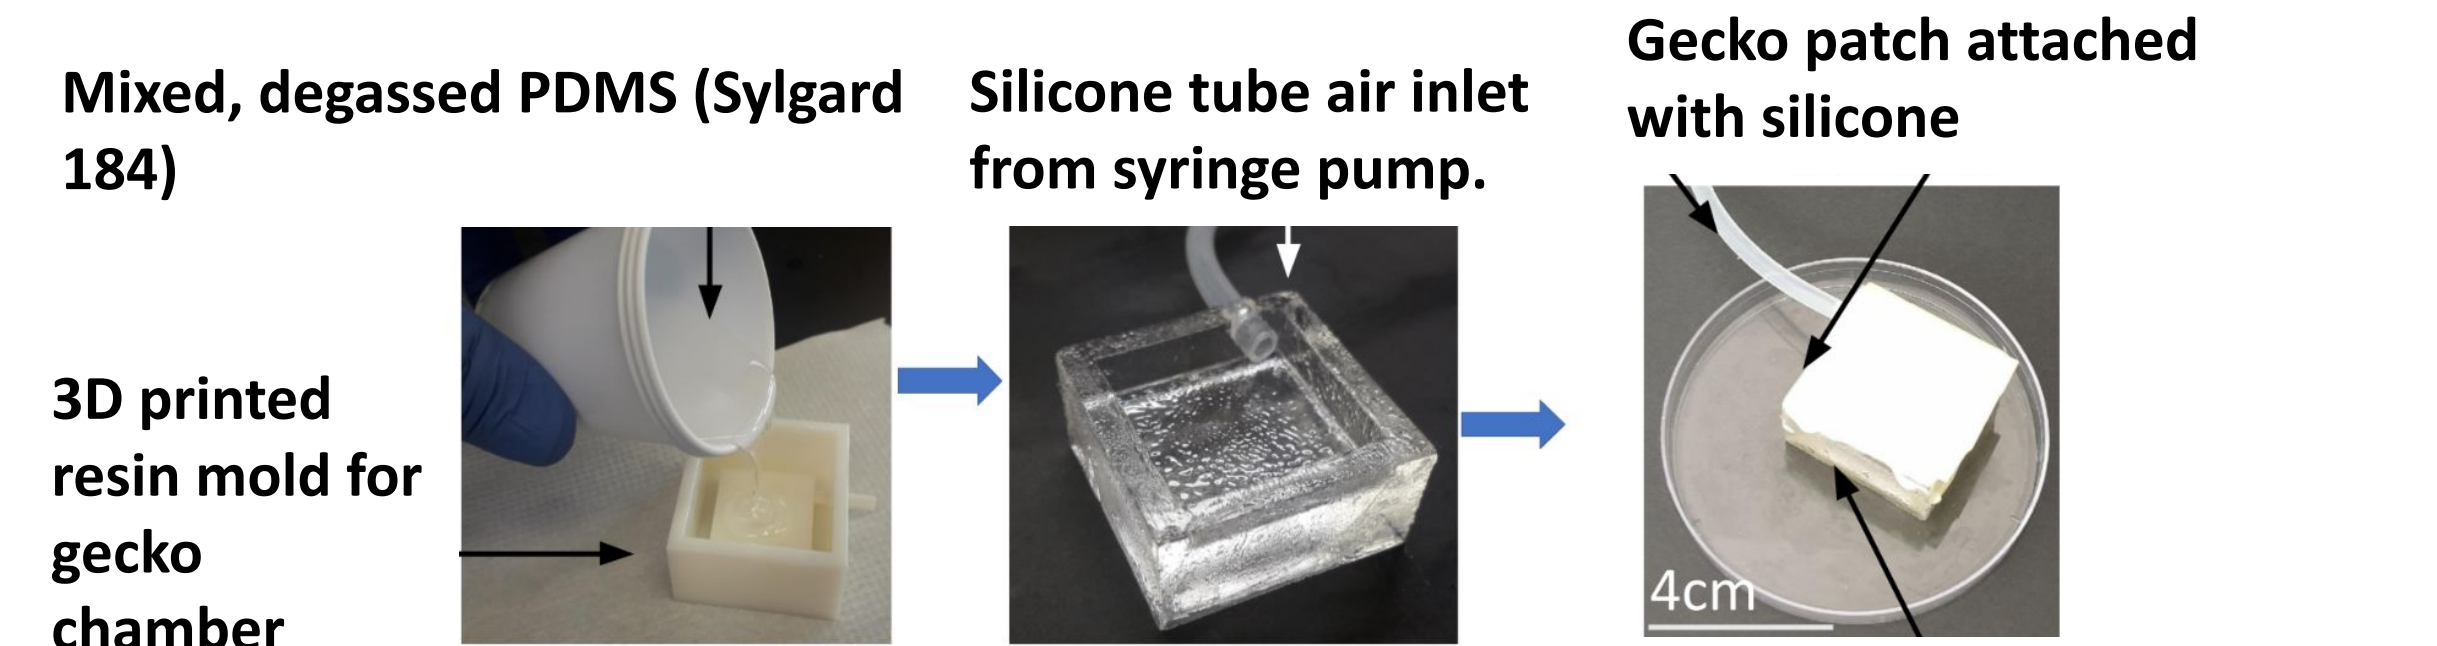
Fabrication process of the gecko chamber using a 3D printed resin mold and PDMS.
